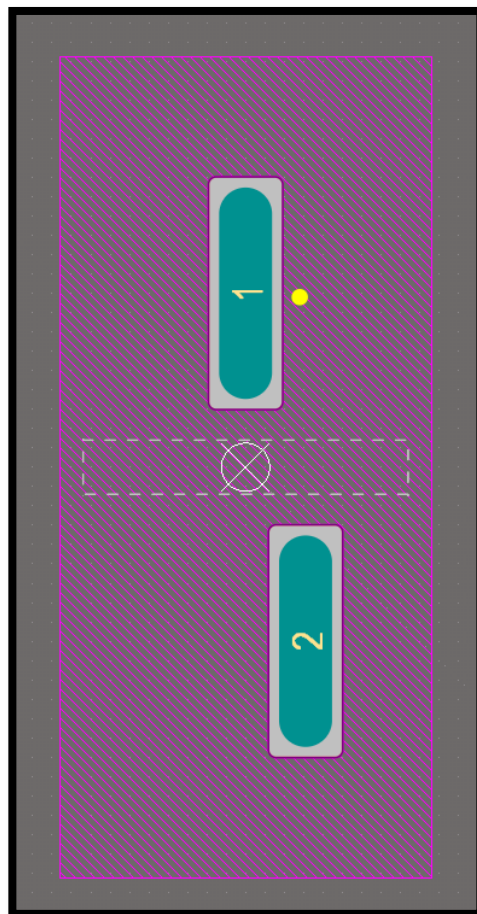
The PCB Footprint for the Power Switch; RD11131100
